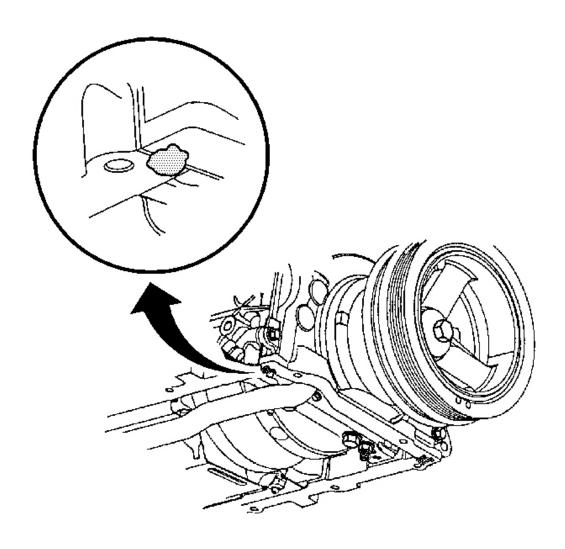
Drilling Oil Pan Gasket Retaining Rivets Courtesy of GENERAL MOTORS CORP.
